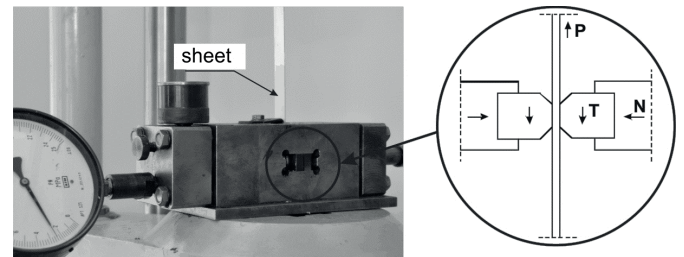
Measurement of friction coefficient: a) view of device, b) strip drawing test schema: P - pull force, N – clamping force, T - friction force
